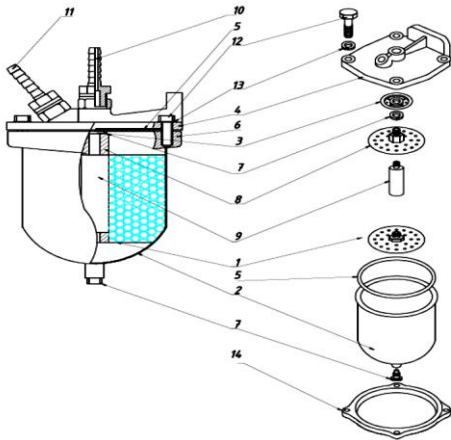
Biogas purification filter: 1 – lower filter element baffle; 2 – filter housing; 3 – distributor; 4 – filter cover; 5 – O-ring; 6 – cup flange; 7 – spring washer 14; 8 – upper filter element baffle with adapter; 9 – centre channel; 10 – biogas inlet connection; 11 – biogas outlet connection; 12 - bolt; 13 – spring flange; 14 – cup flange.
